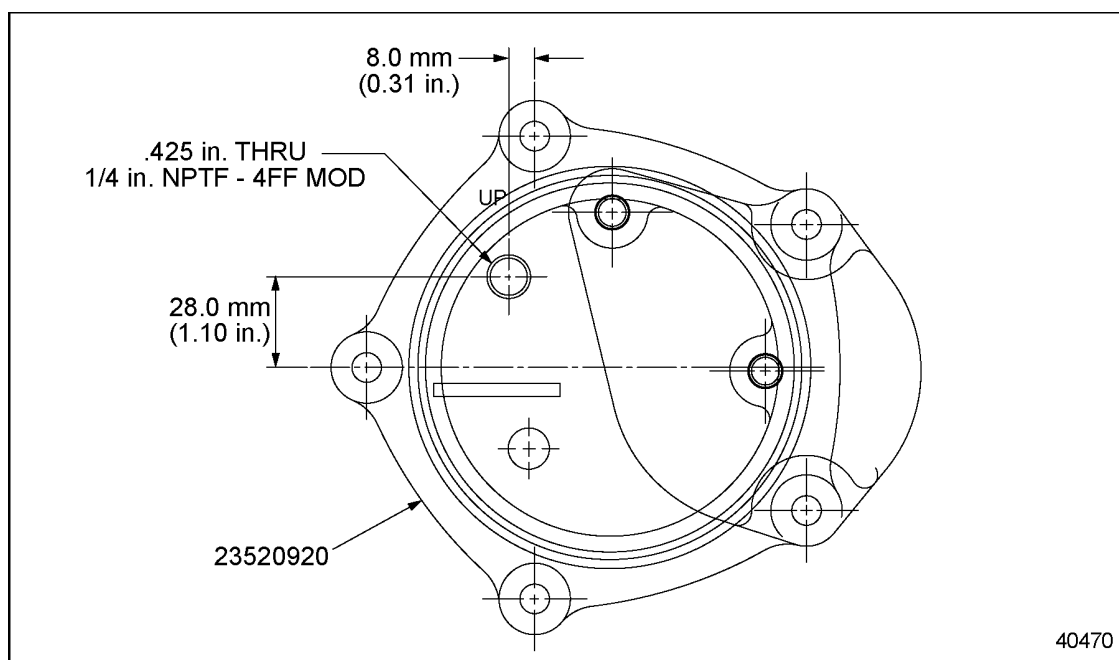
Location of Drilled and Tapped Vent Line Hole in Auto Tensioner Mounting Plate
